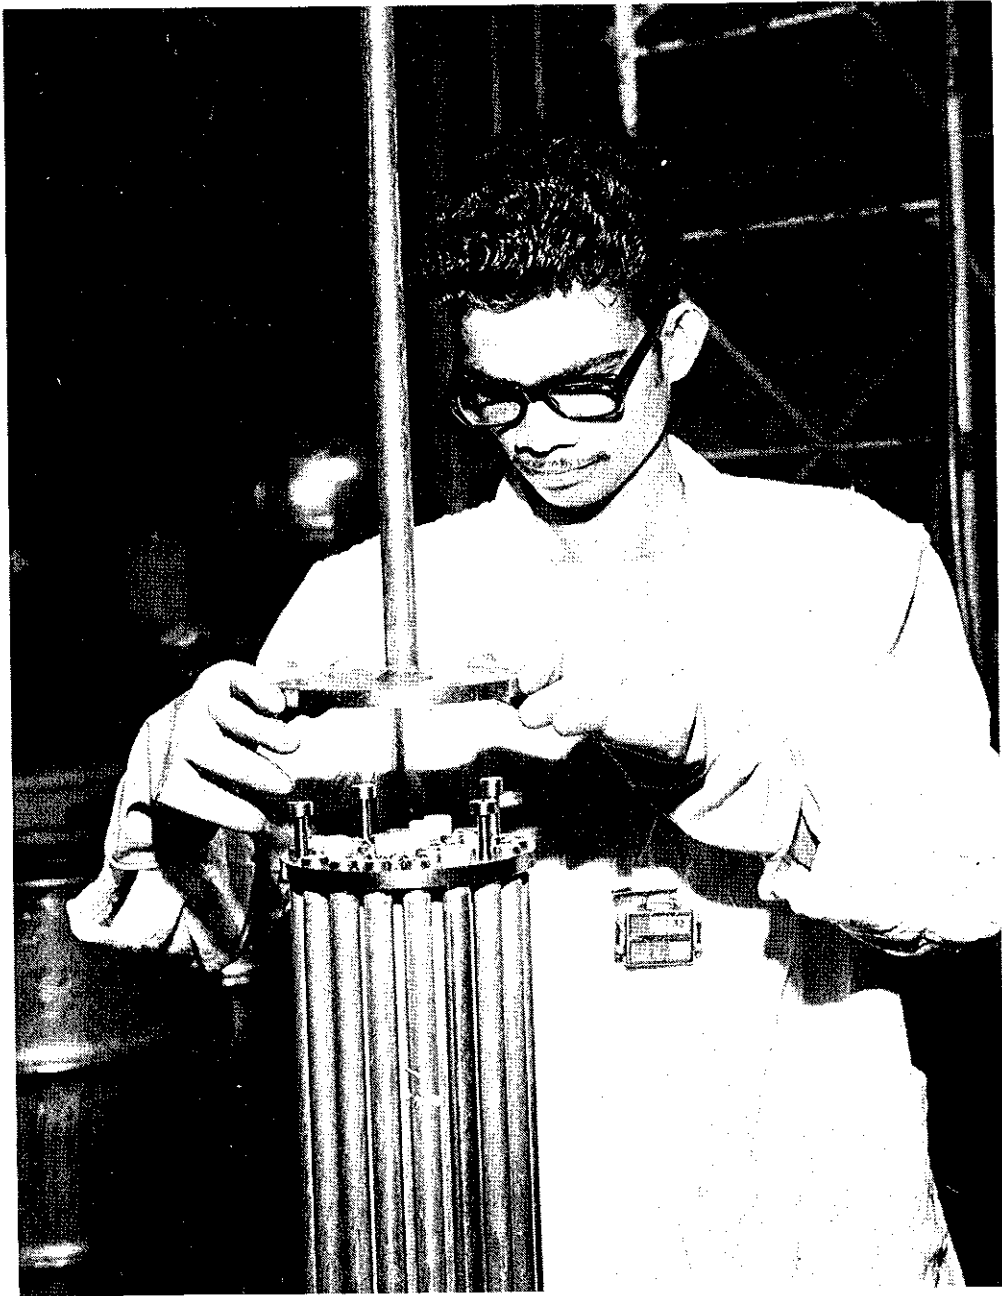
DETAILS OF FUEL PENCILS AND ASSEMBLY OF 7-ROD CLUSTER
